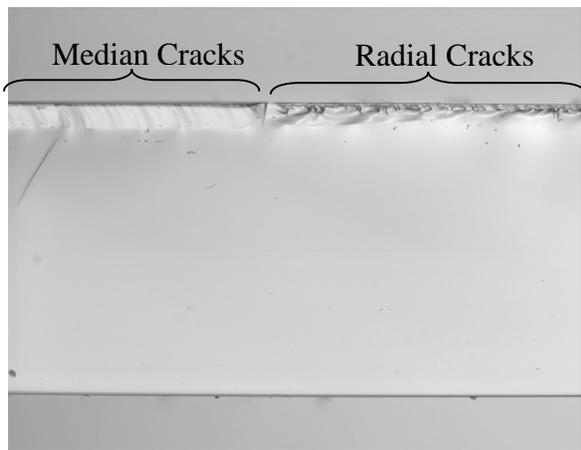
Cut surface where the median crack stopped. Scribe wheel runs left to right.
